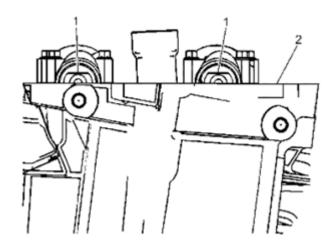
Identifying Flat Sections And Cylinder Head Courtesy of SUZUKI OF AMERICA CORP.
